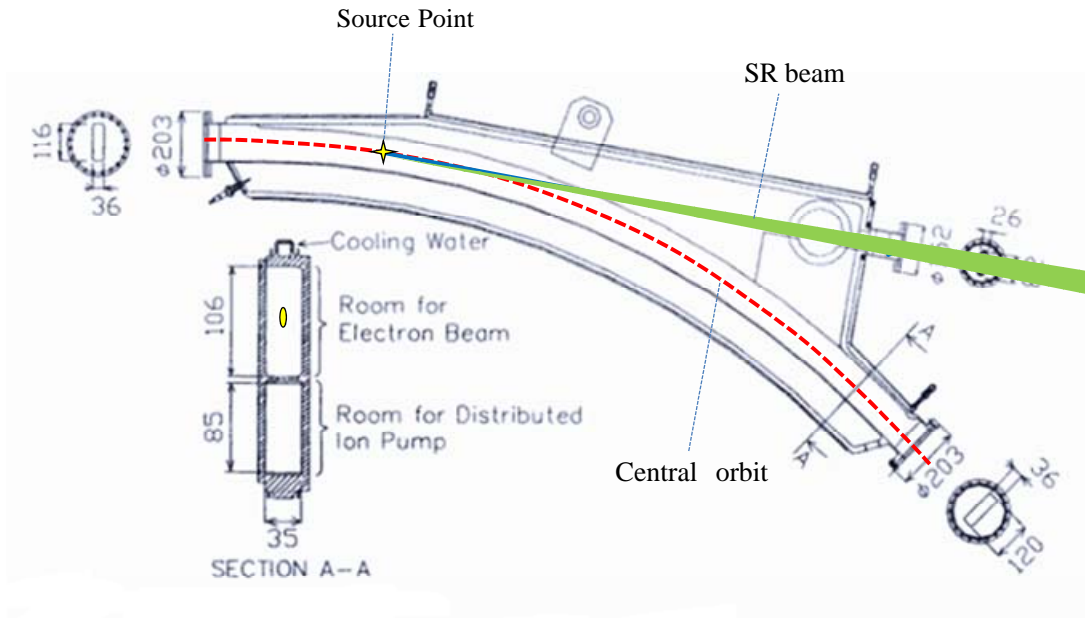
Drawing of the vacuum chamber at BM2 of SPS storage ring
